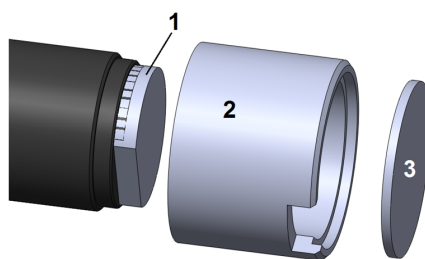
Magnetic shielding of the motor encoder ( $\varnothing 17$  mm): (1) the motor encoder, (2-3) the shielding cap parts.
